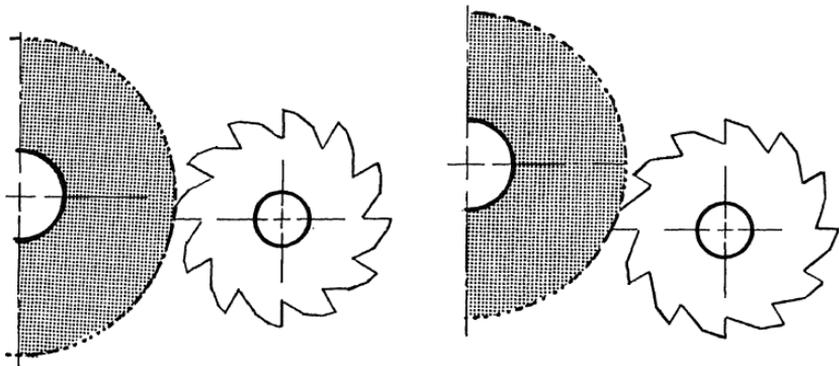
Changing the clearance angle by raising the grinding wheel.
